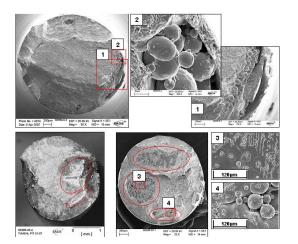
Fracture surfaces of EBM samples showing unmelted powder bulks (EADS, Astrium)
